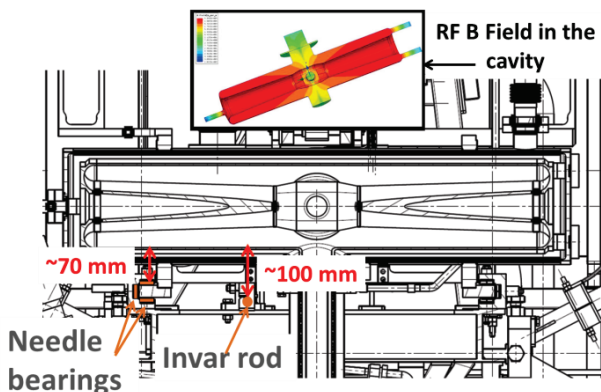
Position of the needle bearings and the invar rod in the cryomodule.
